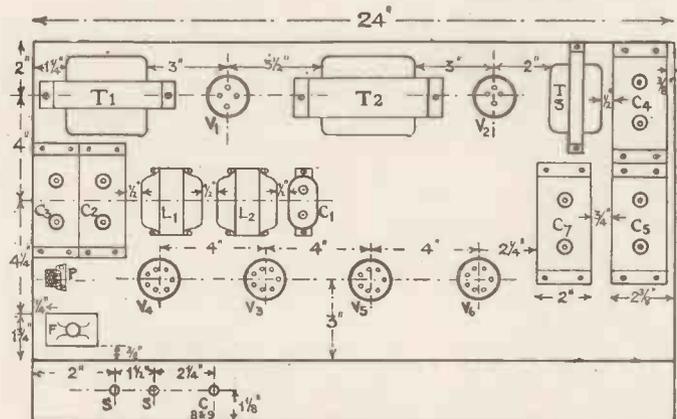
Here is an actual drawing of the chassis showing the space between components.
